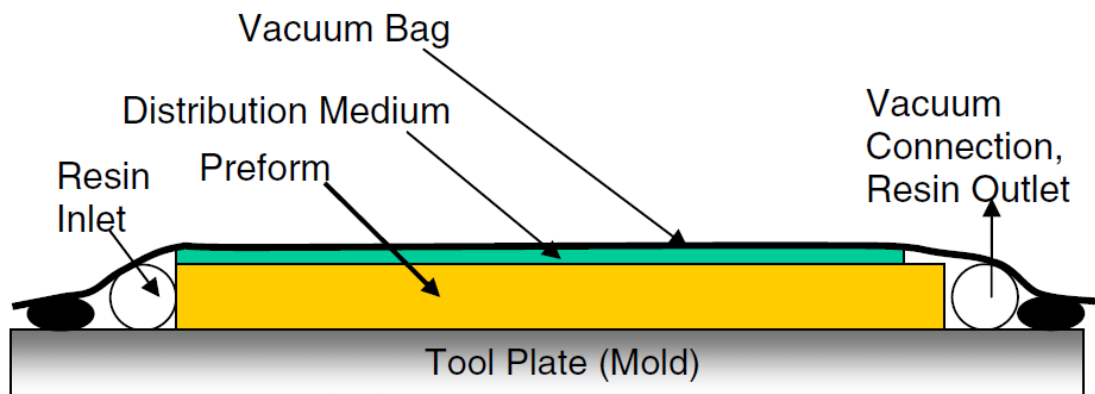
VARTM set-up for manufacture of flat plate [3]
